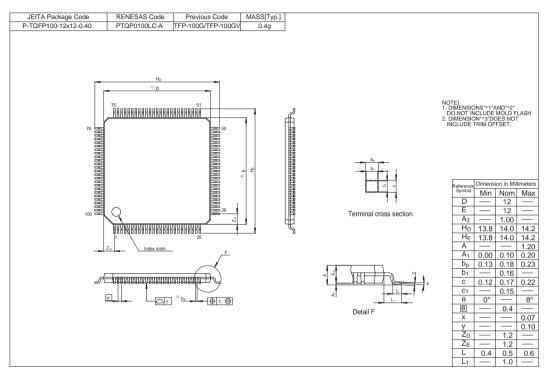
TFP-100G and TFP-100GV Package Dimensions
